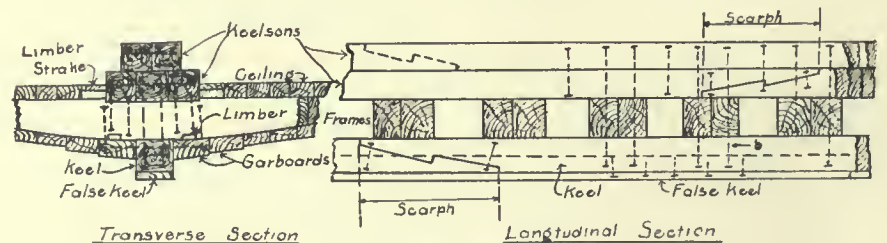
CONSTRUCTION OF BOTTOM GIRDER OF LARGE WOODEN SHIP
